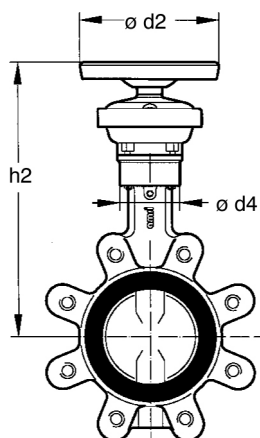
Unit comprising BOAX-SF + MA manual gearbox
